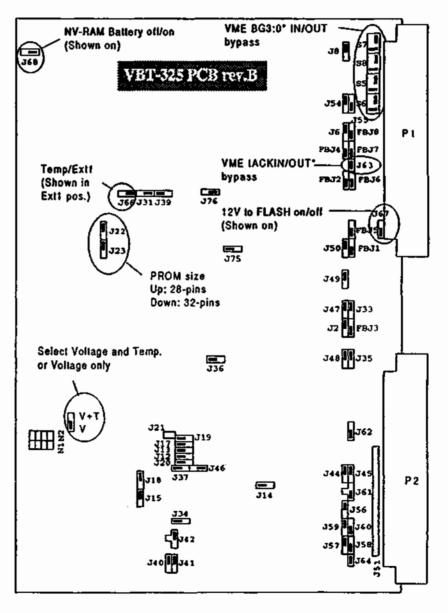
B. Miscellaneous jumper settings VBT-325 PCB rev B.
